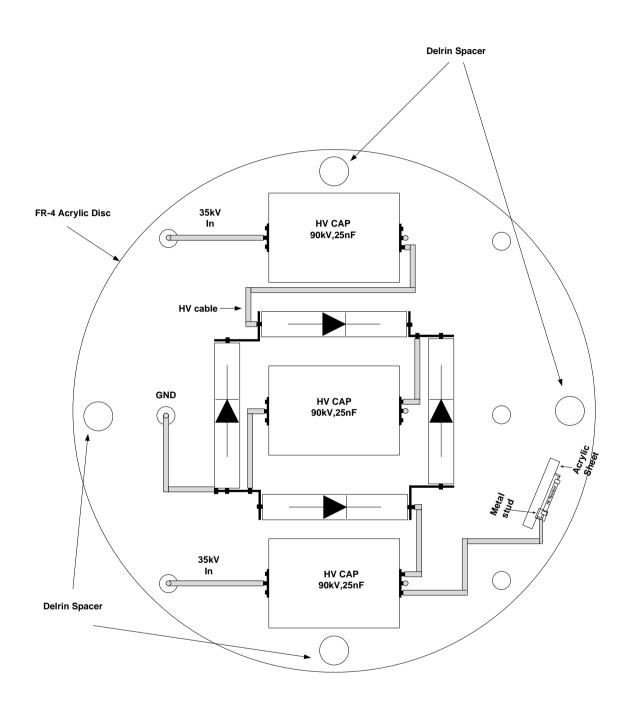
Top View of Voltage Multiplier components assembly on FR-4 Acrylic sheet
